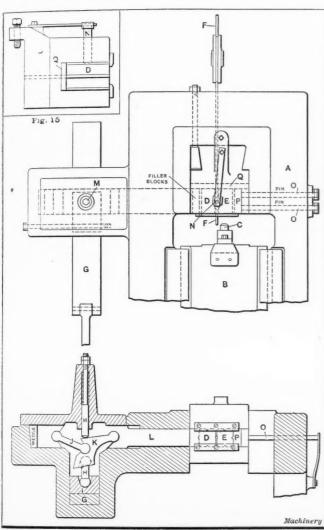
Construction of Die-operating Mechanism for Oper-die Headers, Fig. 15. Side Elevation of Dies and Spring Pin
